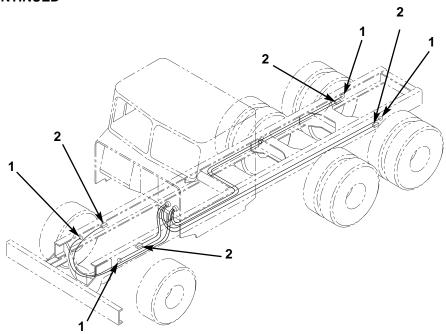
Connecting Rear Wheel Sensor and Modulator Harnesses.
